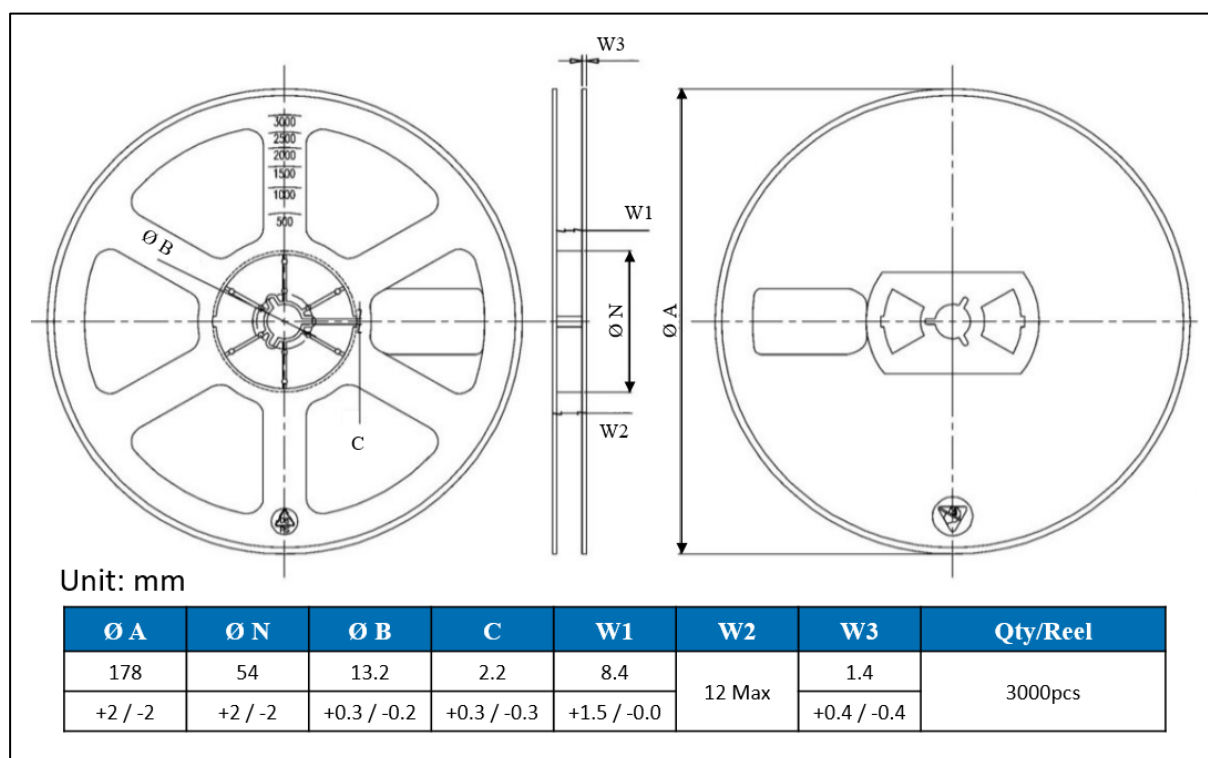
Reel Dimensions (Unit: mm) and Reeling Qty'
